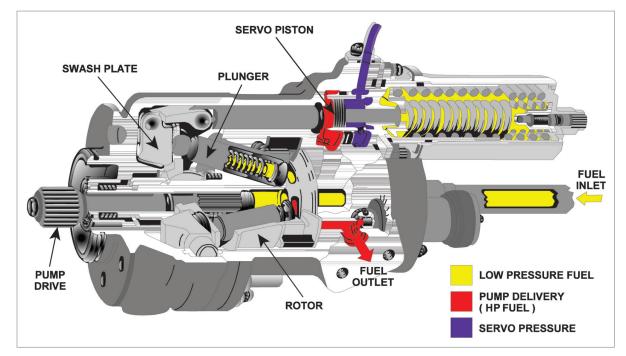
Axial piston type fuel pump (based on an original Rolls Royce drawing)
